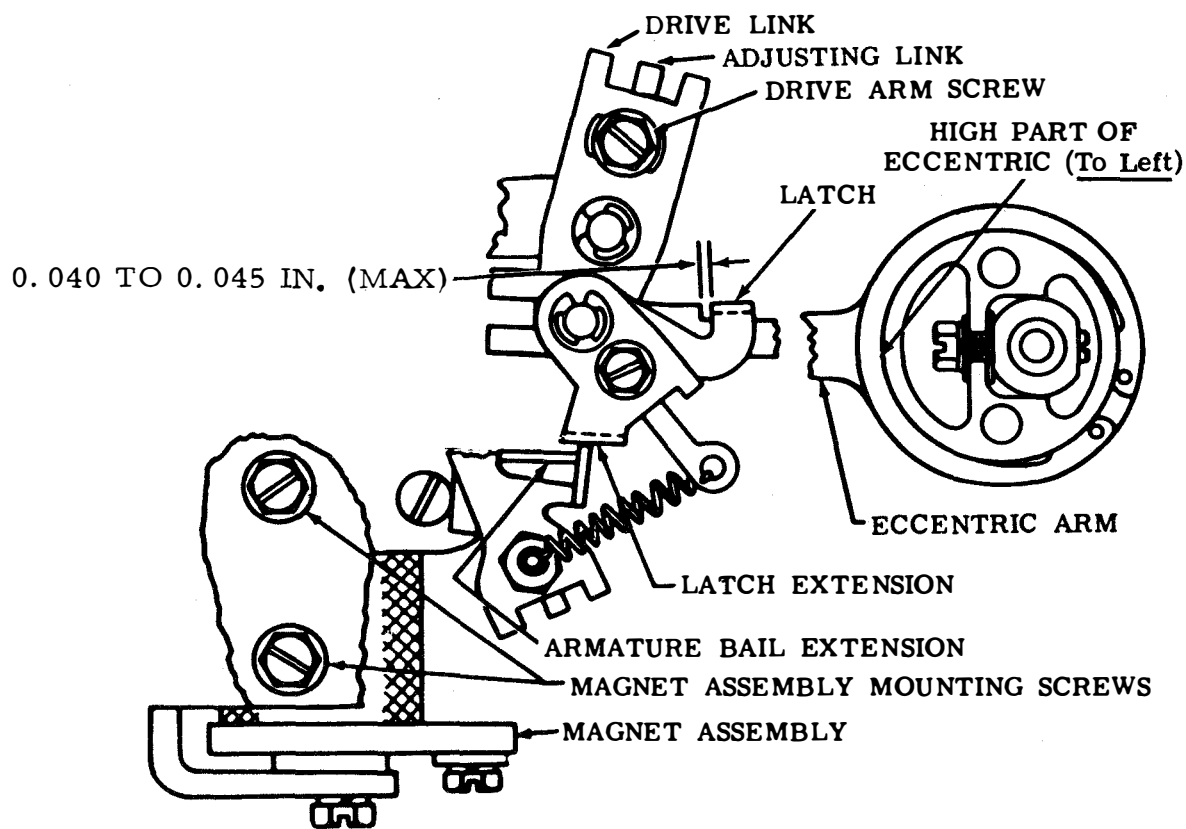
Drive Link (For Fully Perforated Tape), Perforator
